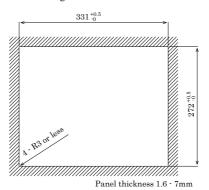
Dimensions of Panel Opening (PT-955LXC-DC5311)
